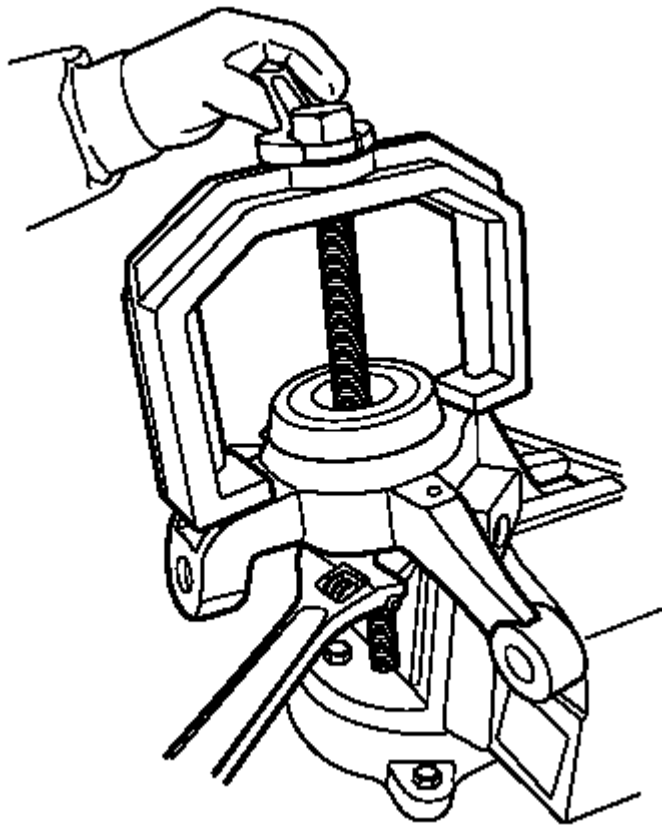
Removing Wheel Bearing From Steering Knuckle
